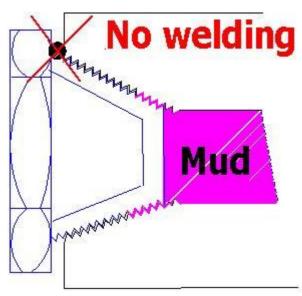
NPT fitting seals on the thread: direct contact between the threads and the (aggressive) mud.
